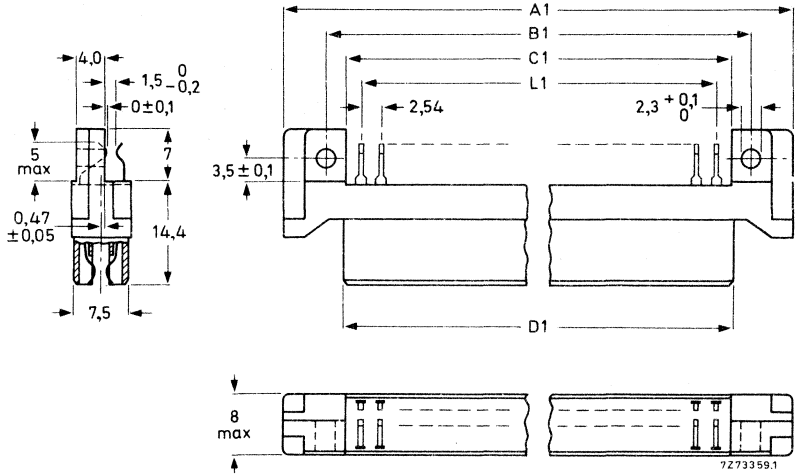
Female part with solder tags; see Table 2 for dimensions A1, B1, C1, D1 and L1.
